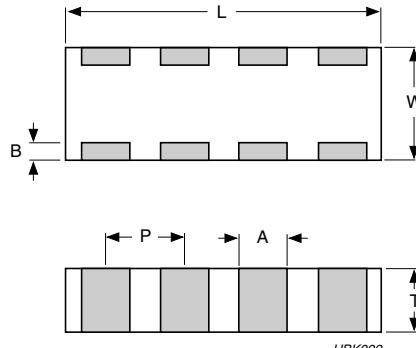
Surface mounted multilayer ceramic capacitor dimension
